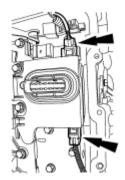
Pressing Tab & Disconnecting Connector Courtesy of FORD MOTOR CO.
